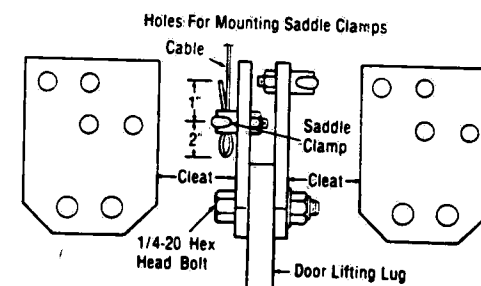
ATTACHING DOOR CABLE TO CLEATS.
